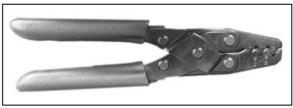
Open Barrel Crimping Tool 14-24 AWG (For optional repairs)
